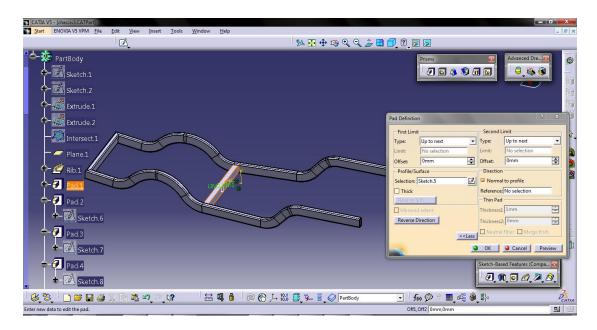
Used Pad Tool For The Side Rails In Chassis
